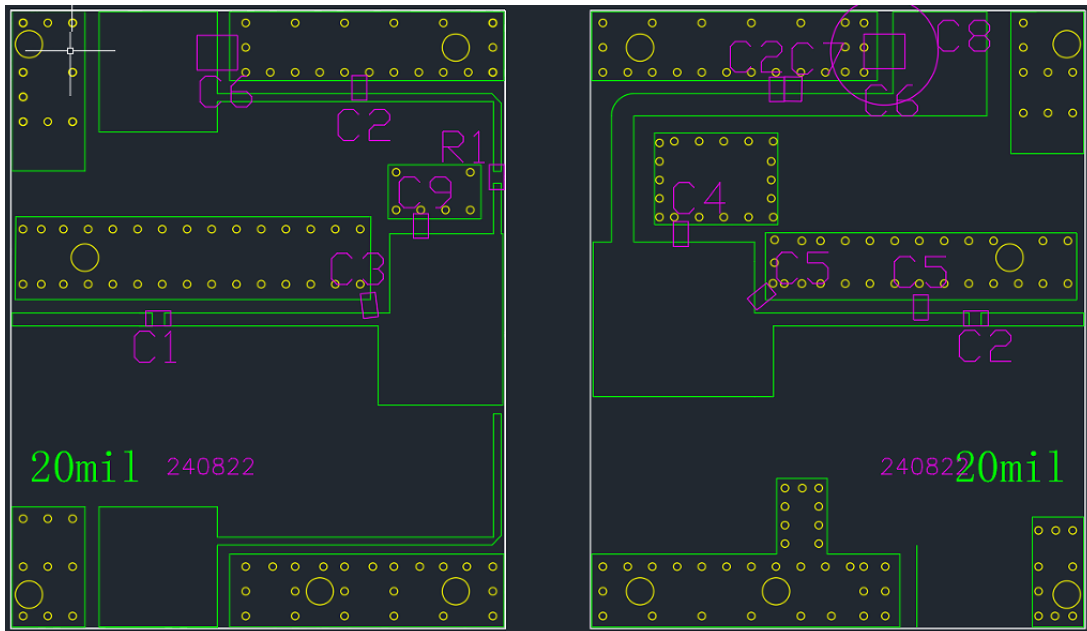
Test Circuit Component Layout, 20mils RO4350B
